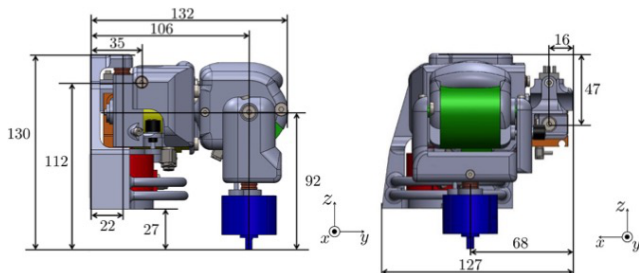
Dimensional outline drawing of the developed shoulder in front (left) and side (right) views
